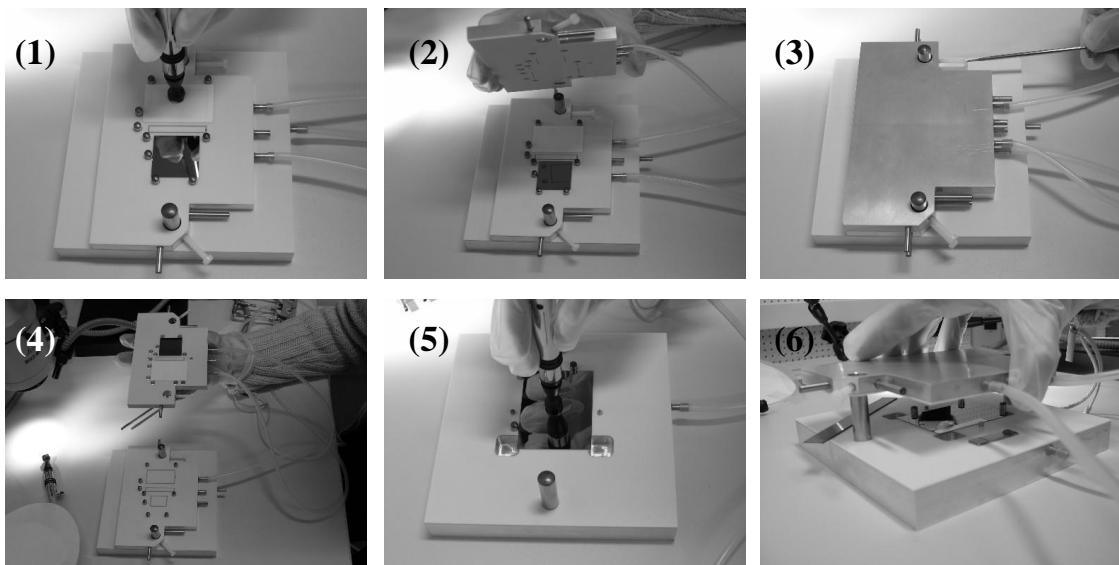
The assembly of a prototype module is done using positioning and transfer plates.
